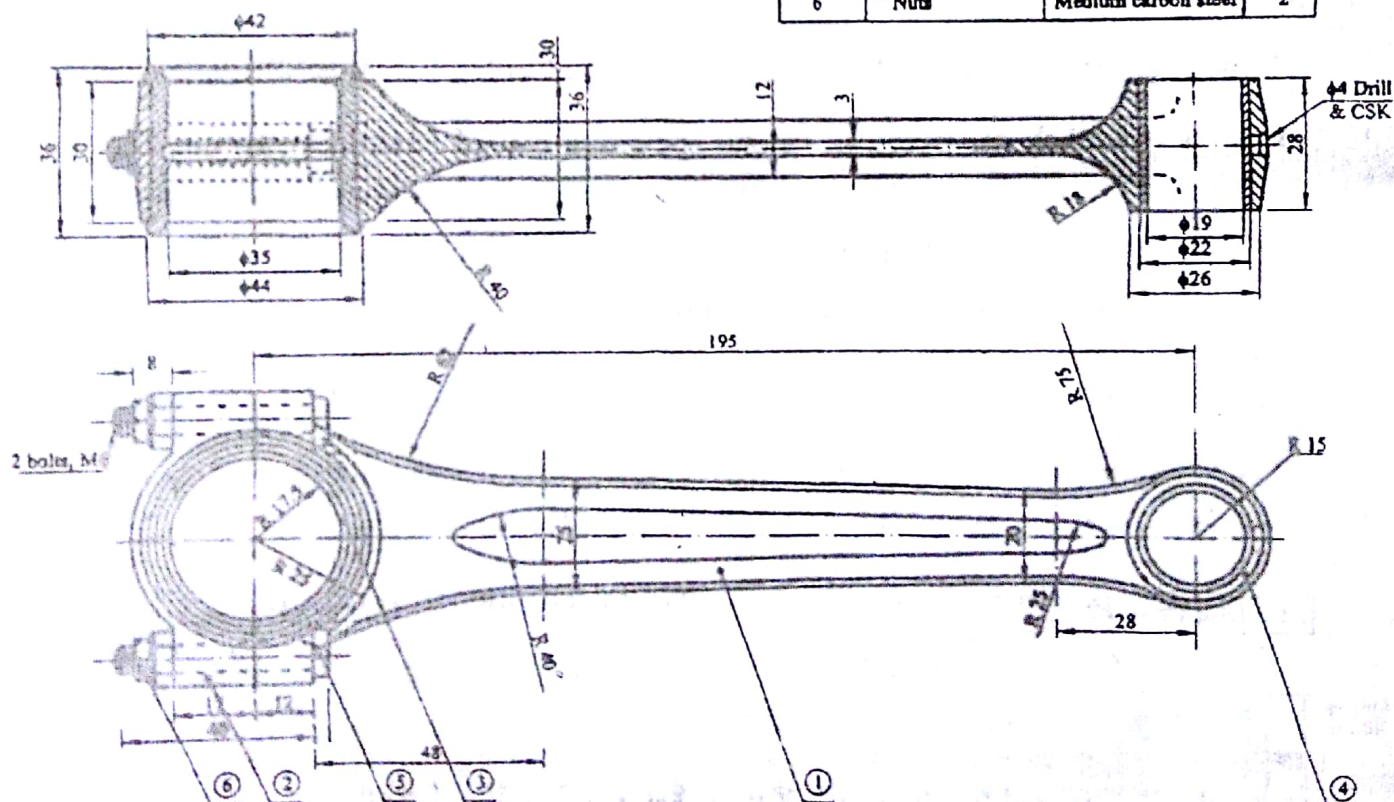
Assembly drawing of Petrol engine connecting rod
